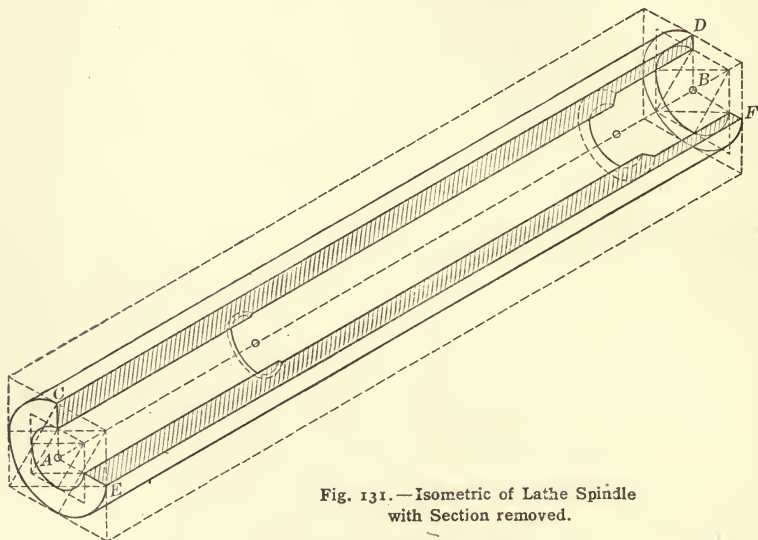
Isometric of Lathe Spindle with Section removed.
